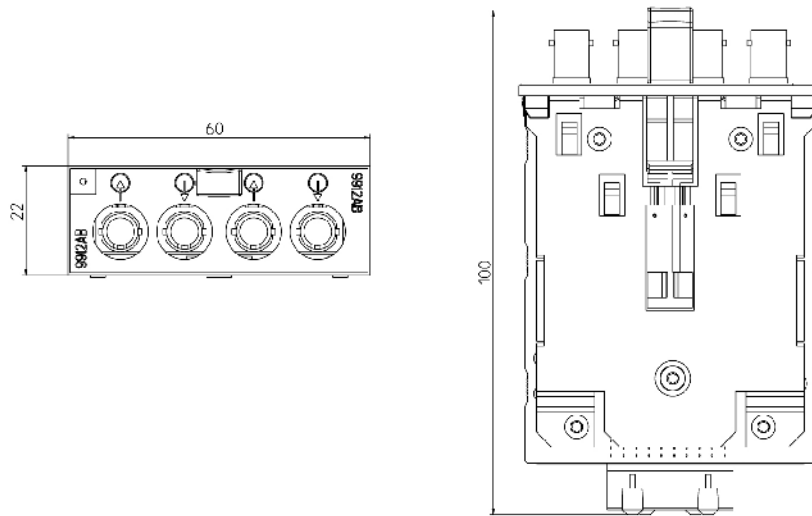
MM900 dimension drawing 3: BFOC ports
